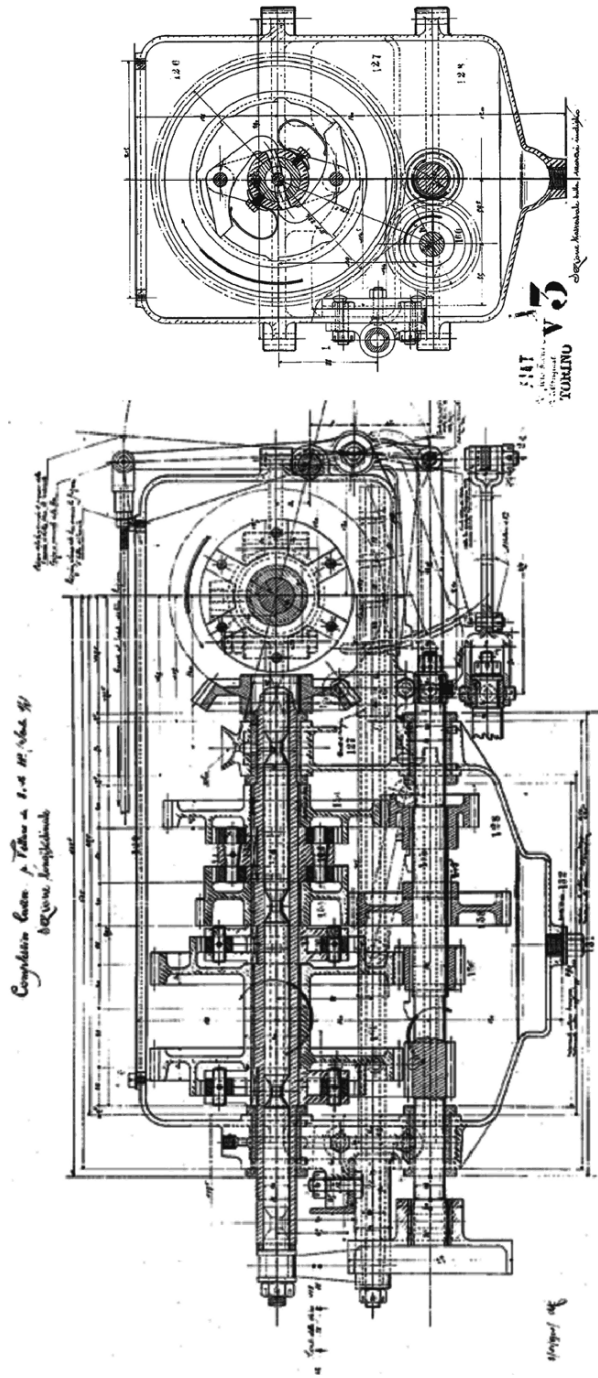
Single stage, three gear gearbox of the FIAT 8/16 HP of 1902. The internal shifting mechanism is made by a cylindrical rod, mounted inside the driven shaft.
